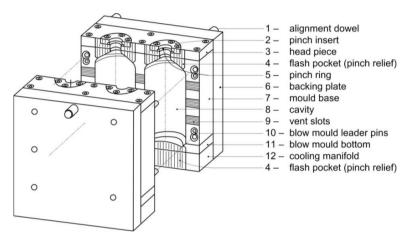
Scheme of an extrusion blow mould [1, 2].
